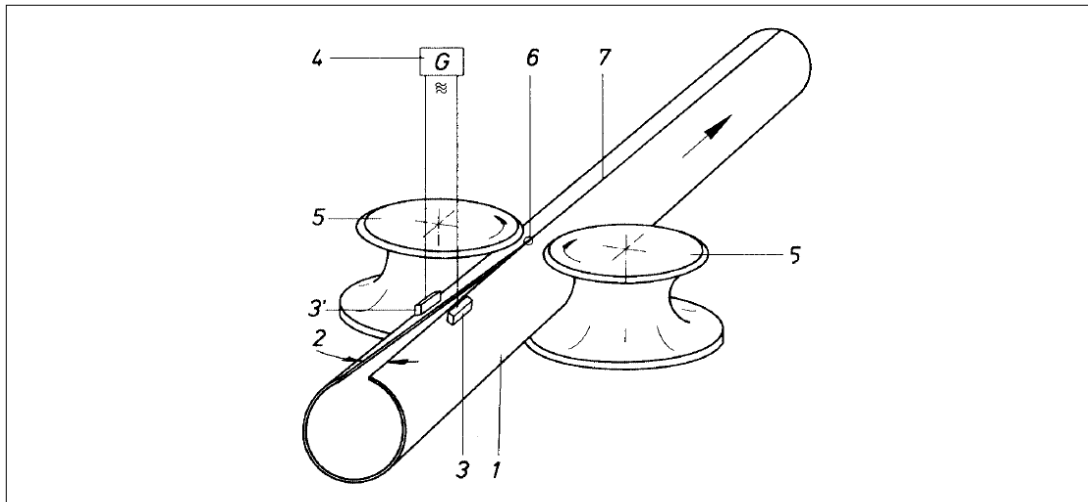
Electric Resistance Welding: 1) Open-seam tube; 2) Welding gap entry angle; 3) and 3') Sliding contacts; 4) Welding generator; 5) Squeeze rolls; 6) Welding point; 7) Weld [15]
